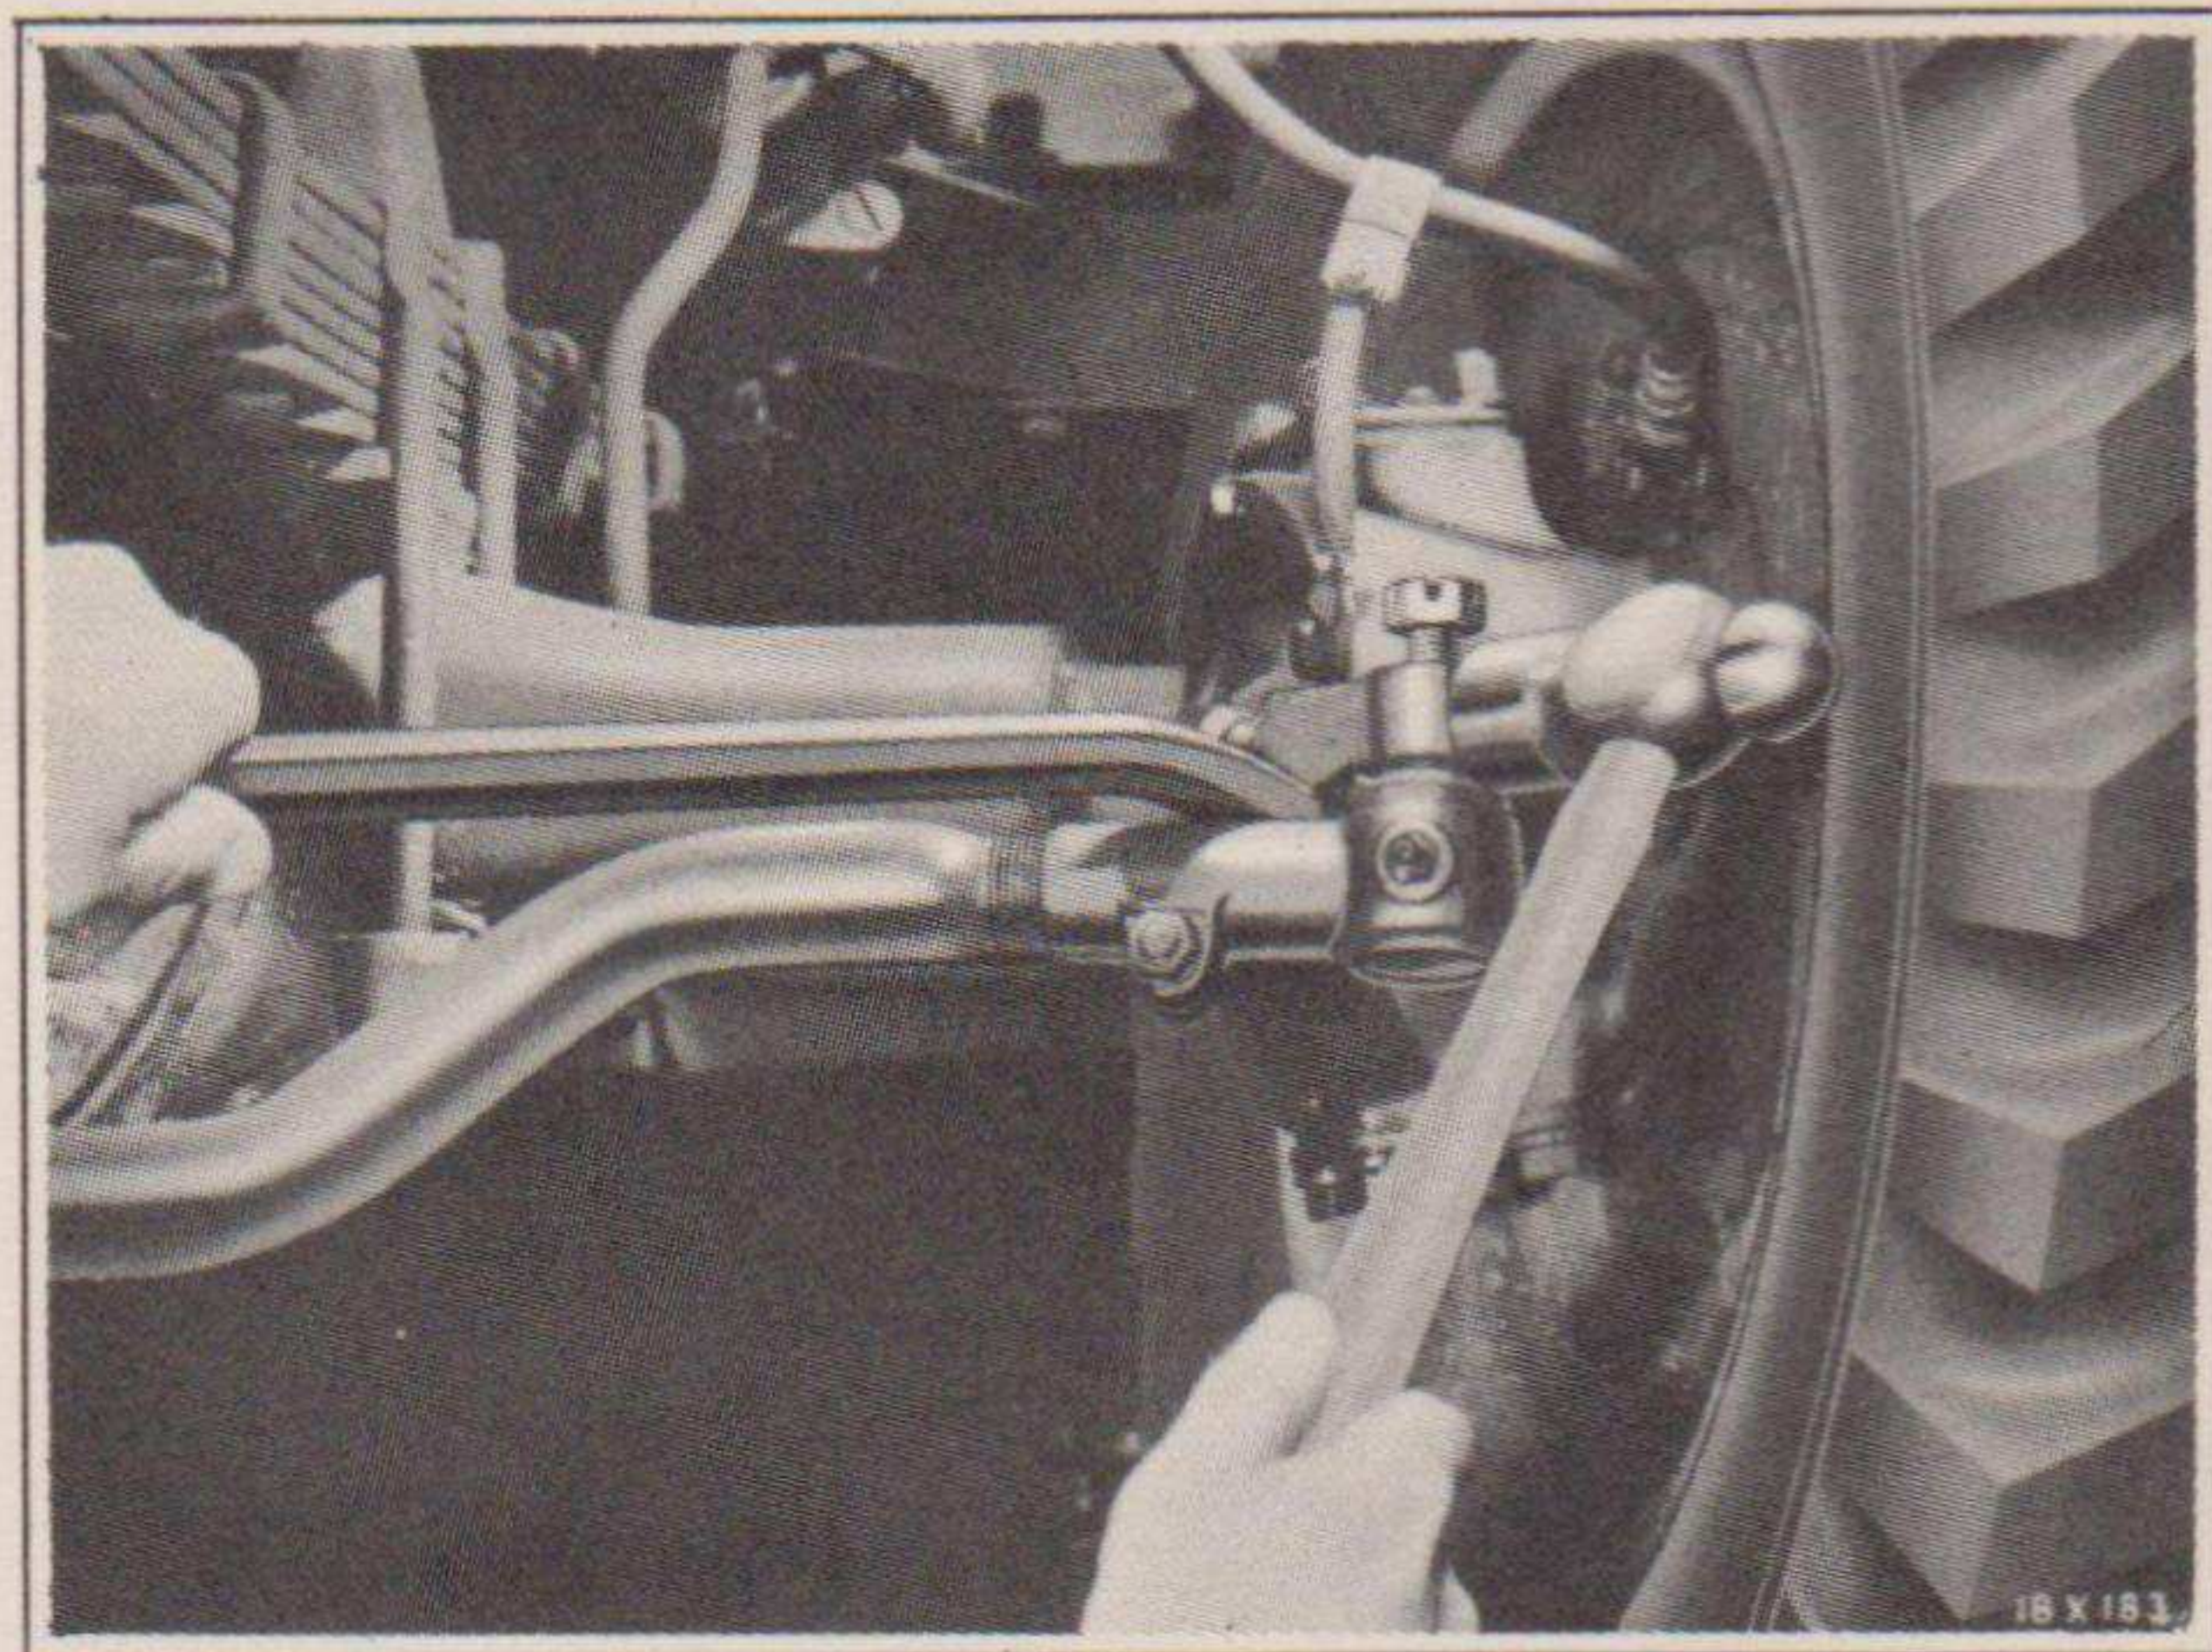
Removing Steering Tie Rod Ends from the Steering Knuckle Flange
